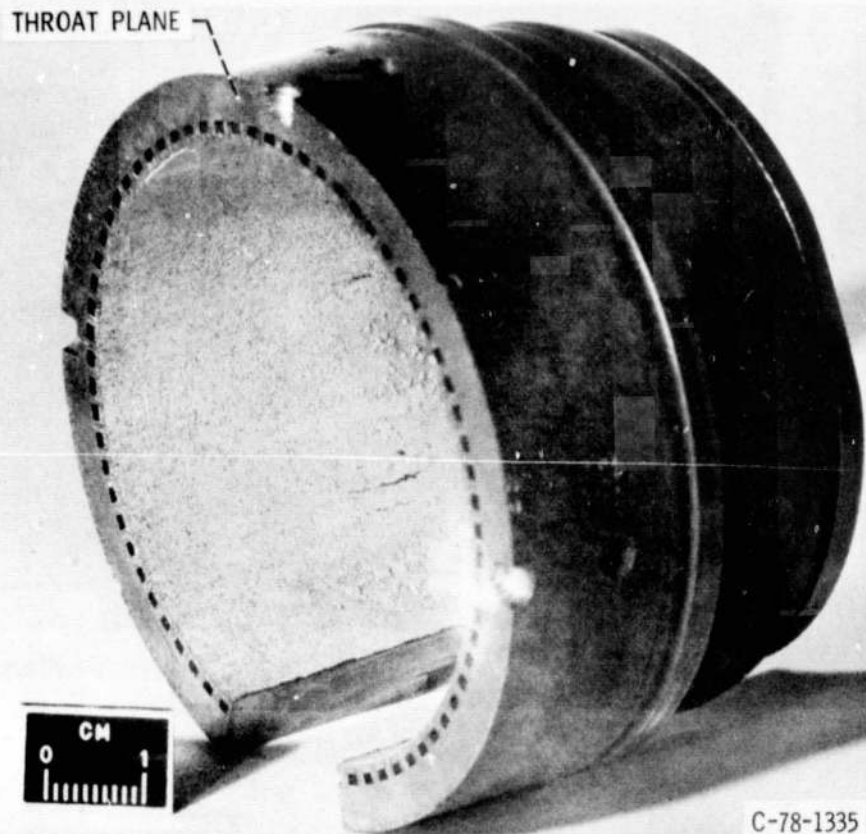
Uniformly eroded coating surface of cylinder S/N 37.
